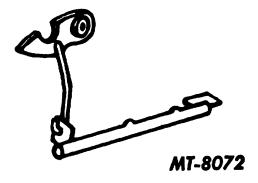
Lockout Latch, Wire Hook and Trip Rod
